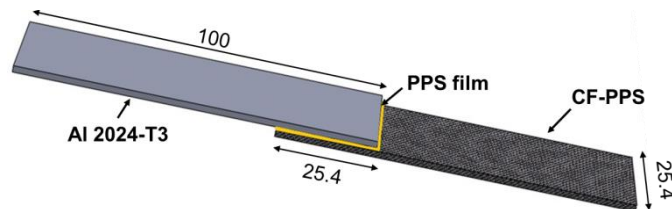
Configuration and dimensions (in mm) of the joining parts.
